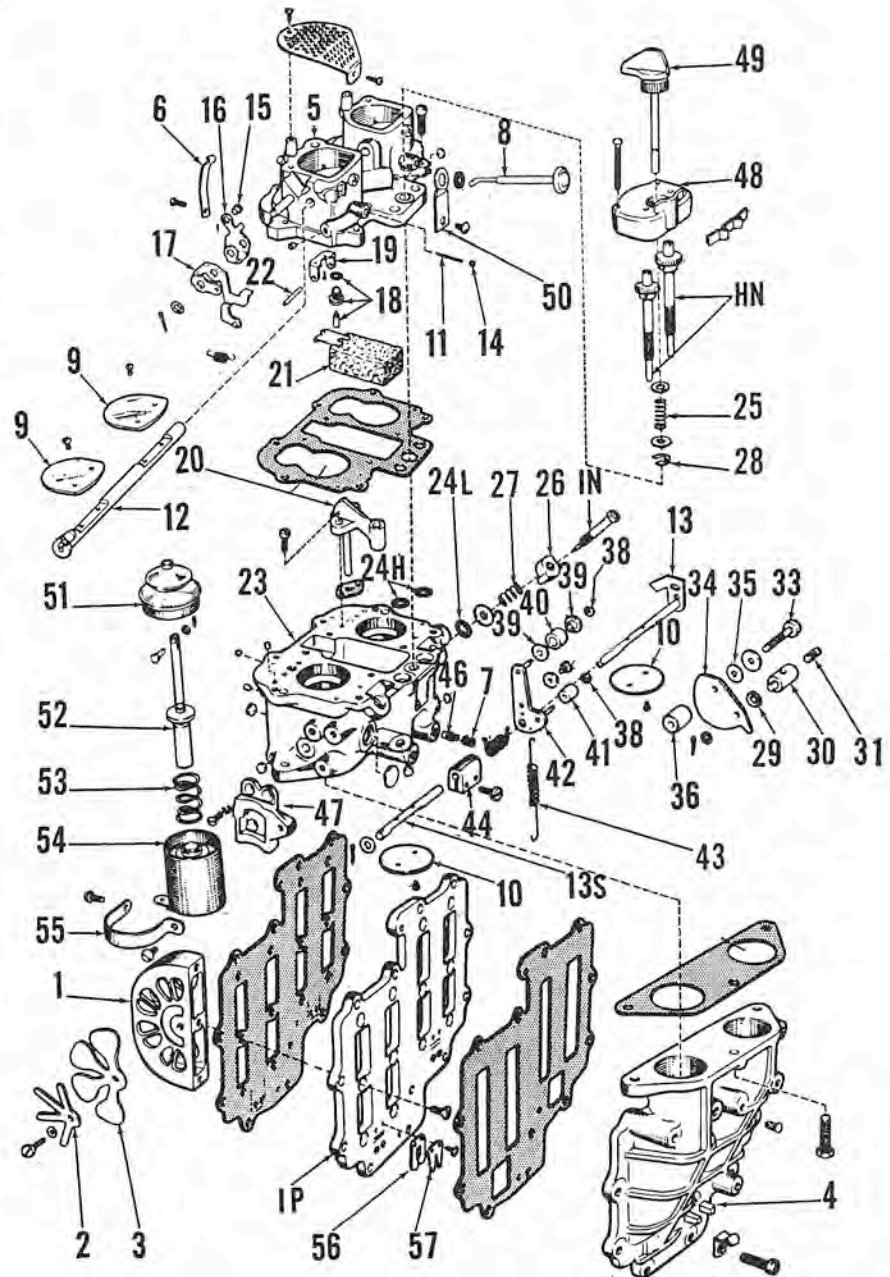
Exploded view of carburetor, intake manifold and reed valves used on 50 hp models. Carburetor is equipped with solenoid operated electric choke.
